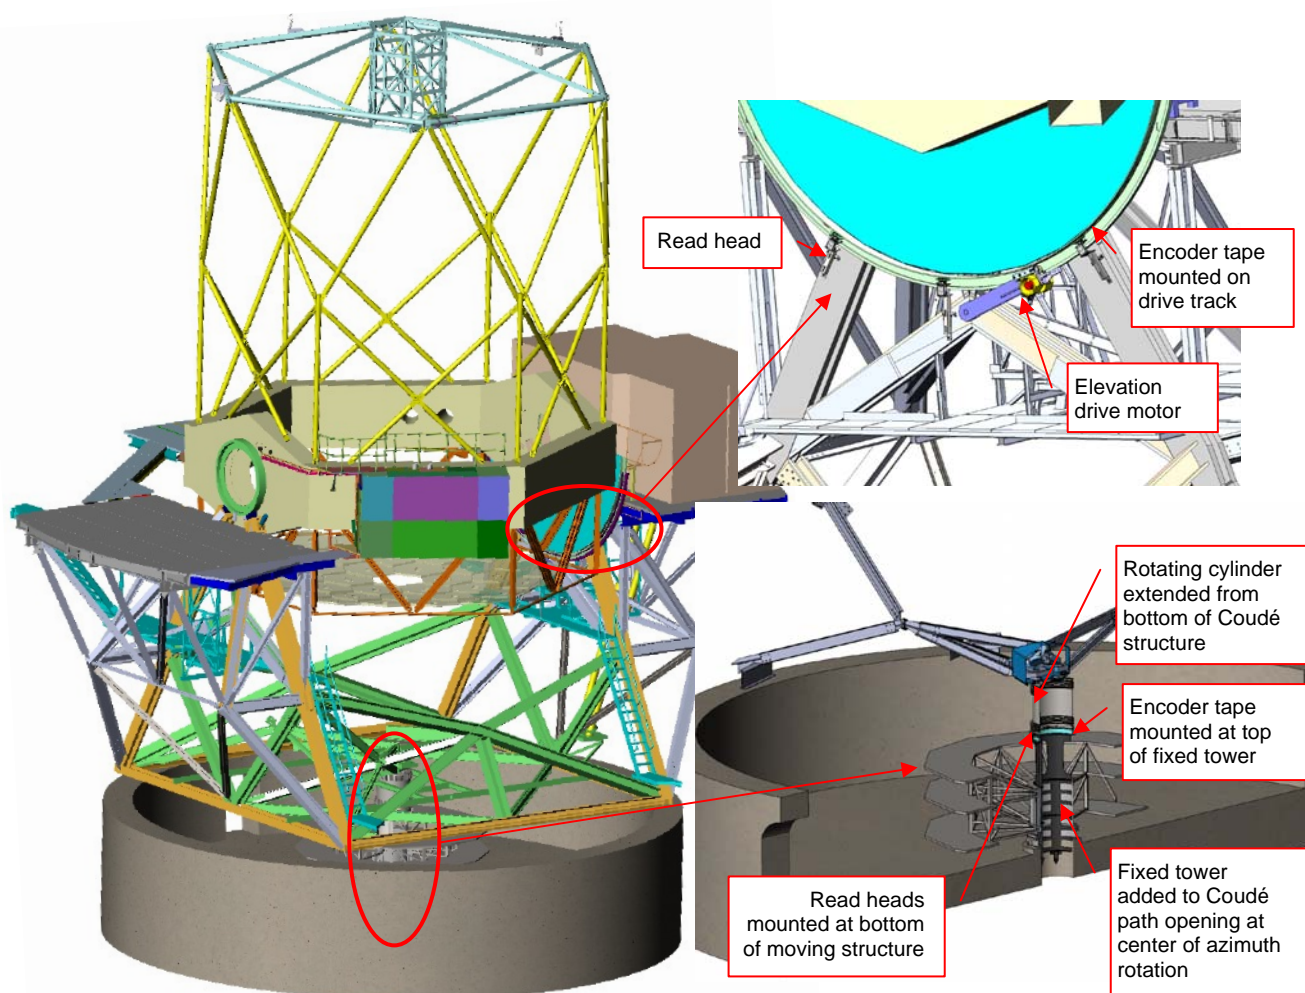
New azimuth and elevation encoders on the Keck II telescope
